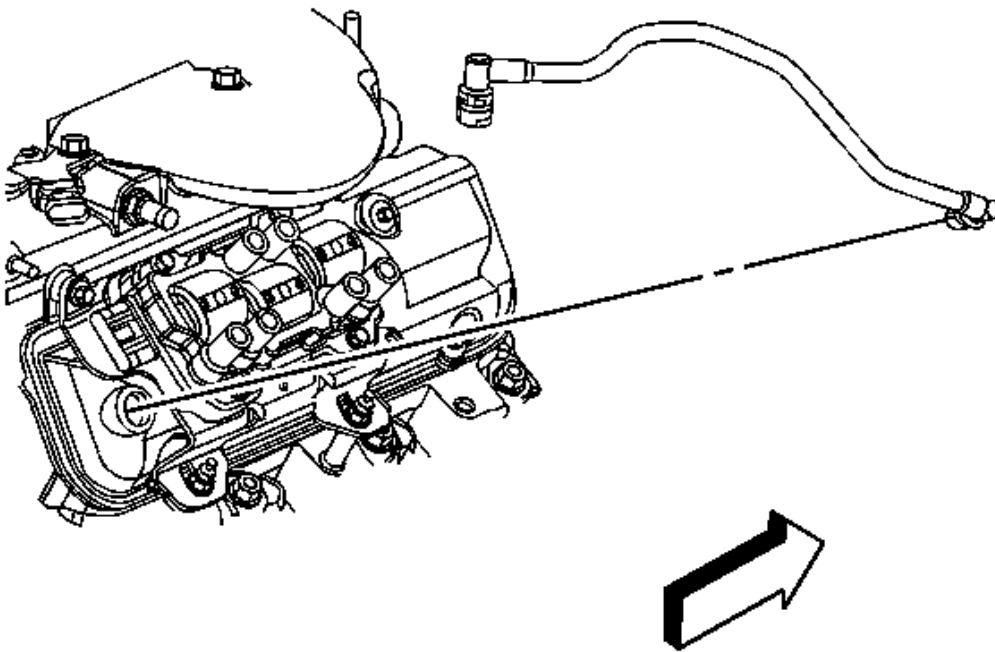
Positive Crankcase Ventilation (PCV) Fresh Air Tube
